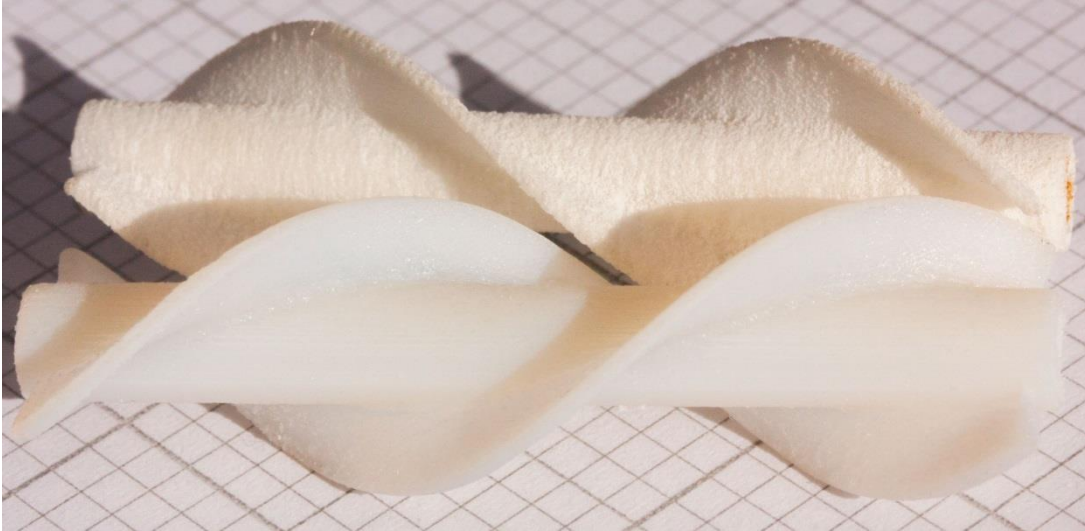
Two rapid prototyped dual sweep helical screws, photographed on a 2mm grid. Foreground screw produced using Polyjet manufacturing process; rear screw, produced using SLS, shows clear layer based stepping in the geometry along the screw length.
